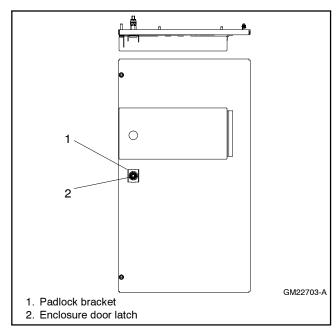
Attaching Padlock Bracket on Enclosure Door (welded enclosures only)
